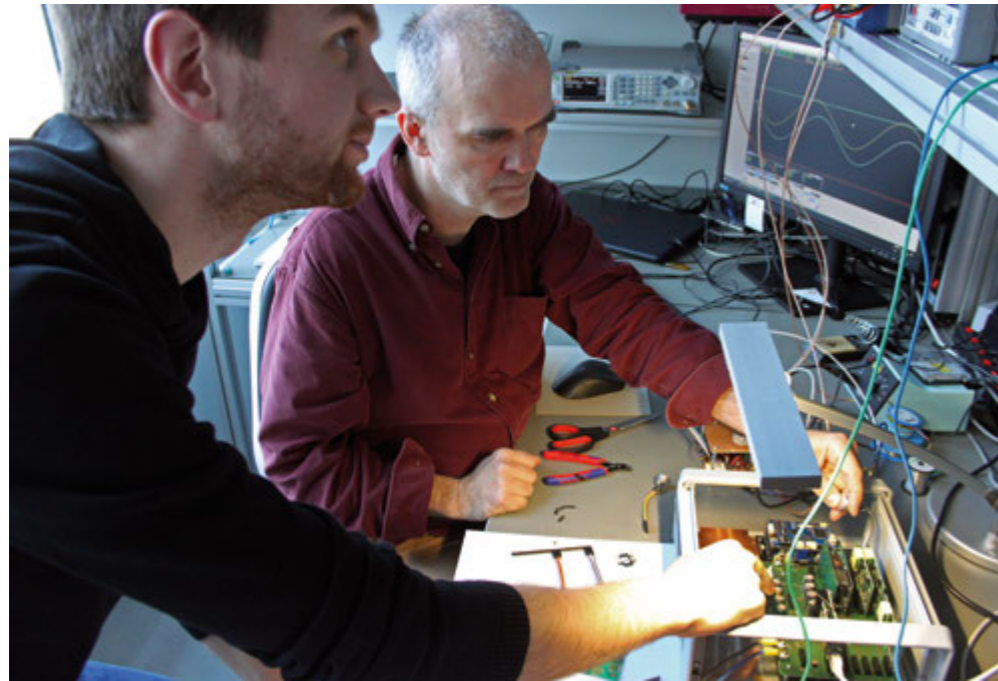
Colleagues of the Prototype Engineering Lab assembling a prototype in their laboratory. Abb. 2. Kollegen des Entwicklungszentrums im Labor zum Aufbau von Prototypen.
